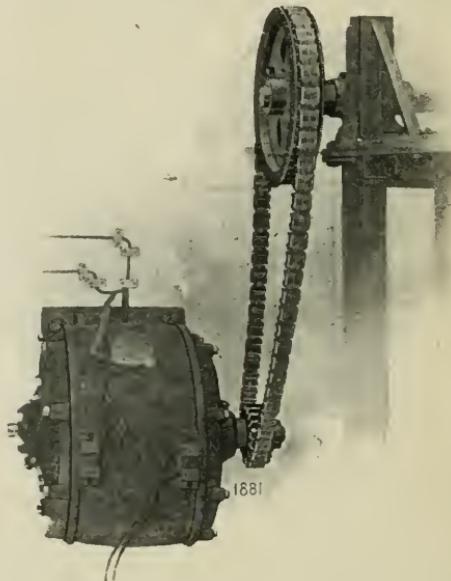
$7\frac{1}{2}$ -horsepower motor drive, 710 revolutions per minute. Drive curing machines.
